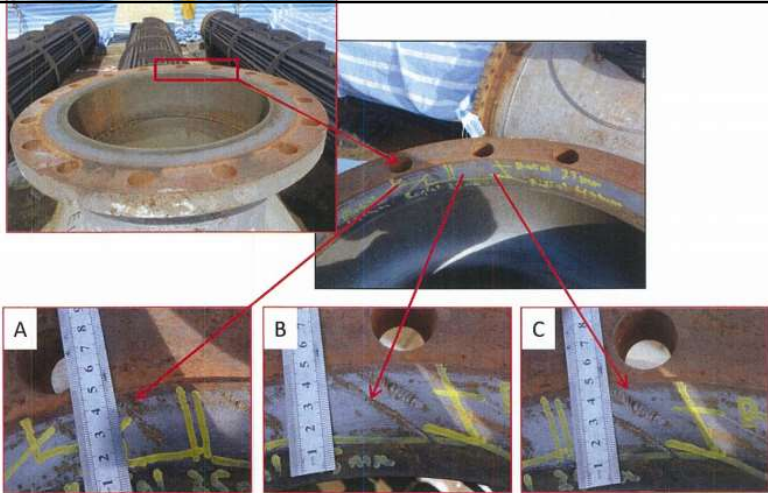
Flange Surface Damage Assessment: Pits and Dents
